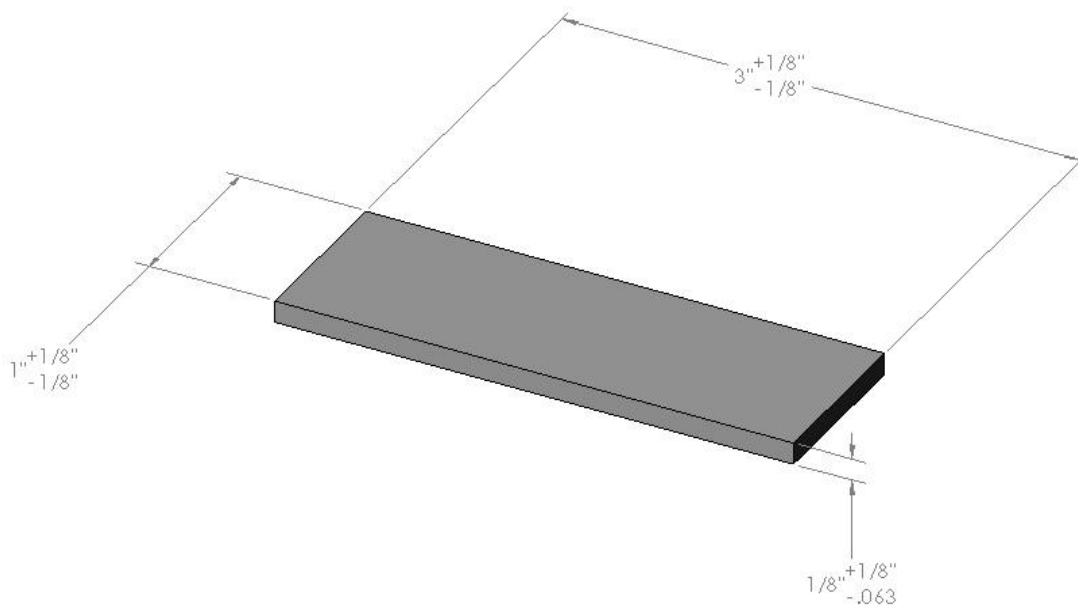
Machined sample dimensions for heavily, partially and lightly coated ZE41A to be used in coating coverage experiments.
